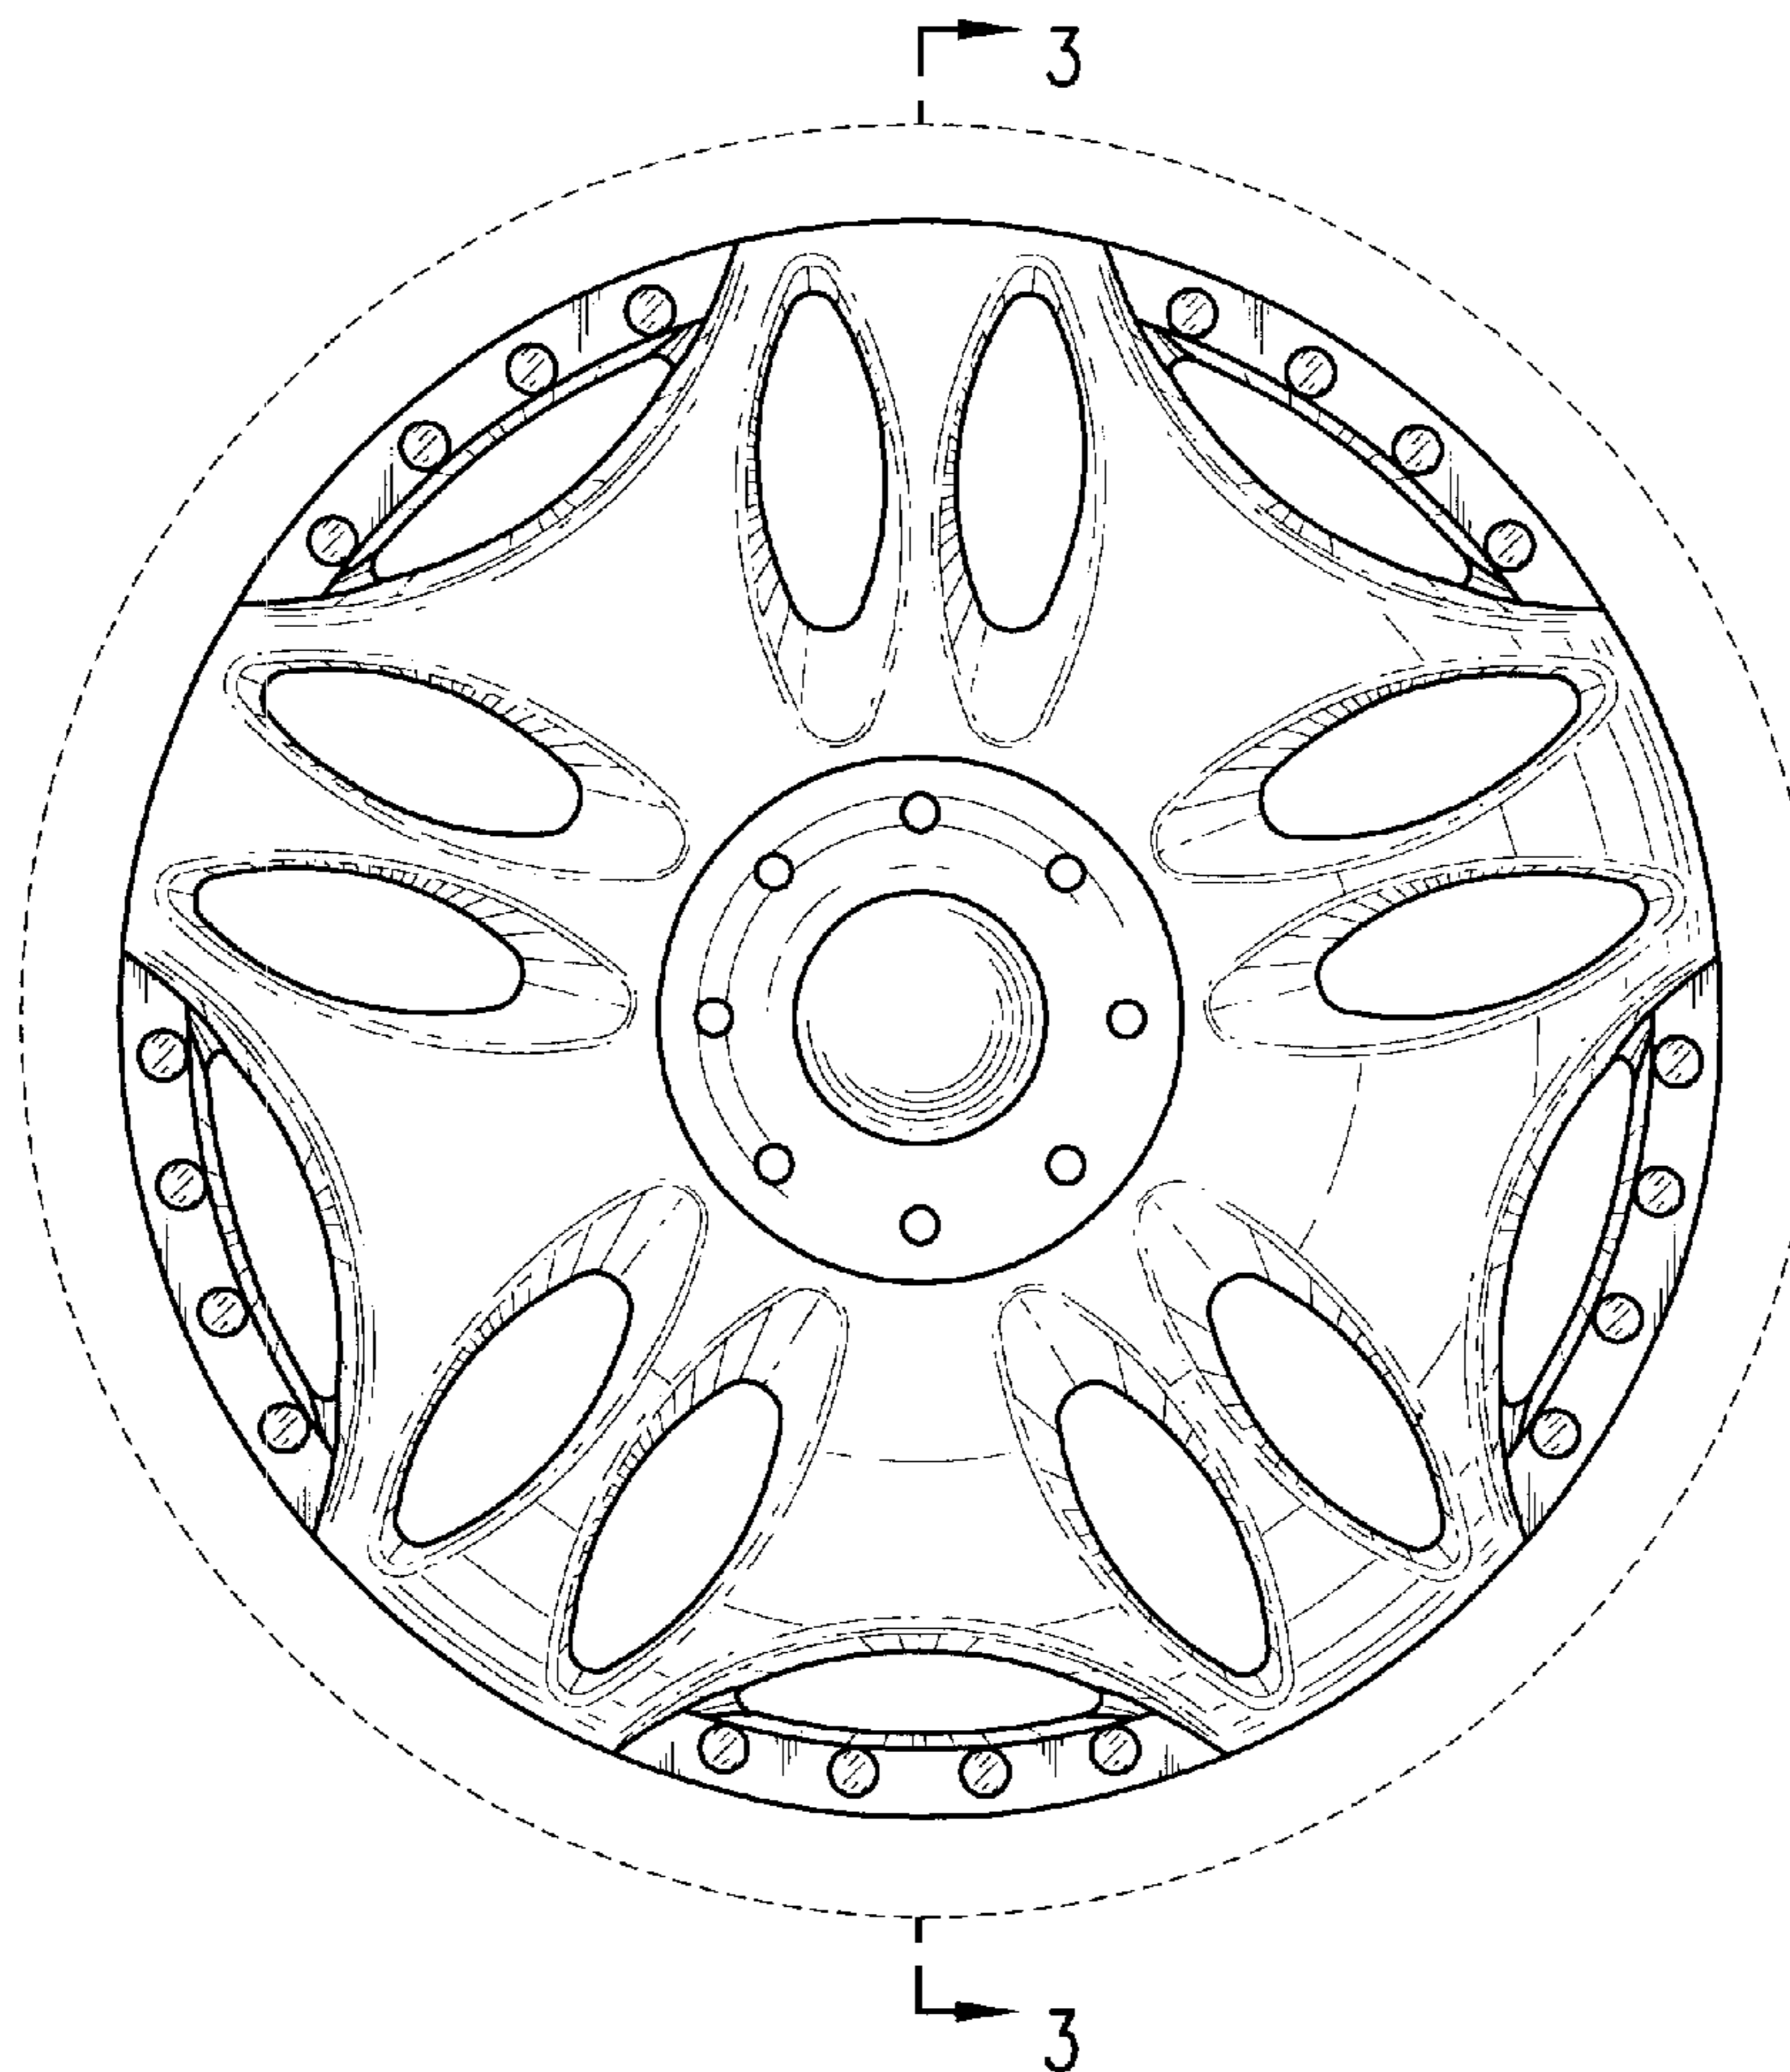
is a perspective view of the vehicle wheel showing my new design;
